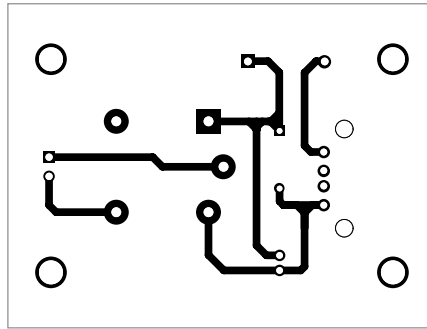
Actual-size PCB of the add-on USB switch circuit
